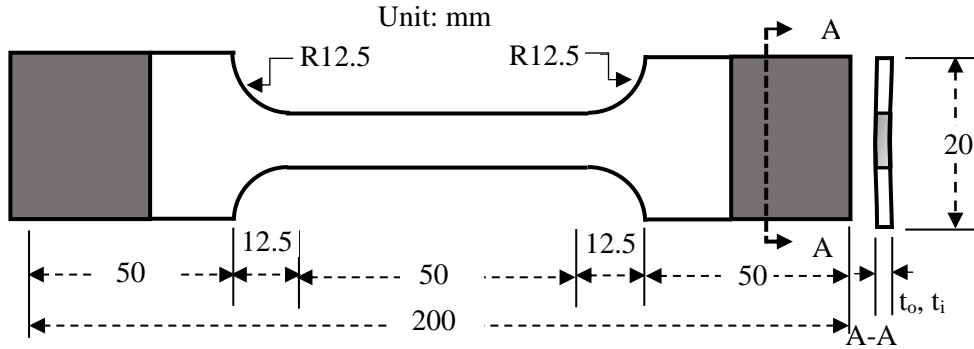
Geometry and dimensions of test specimens (coupons)
